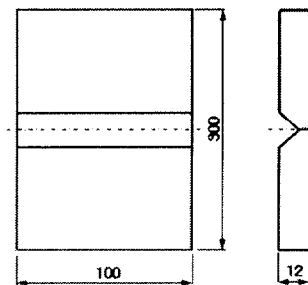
Specimen of Y-groove butt joint for MAG welding
